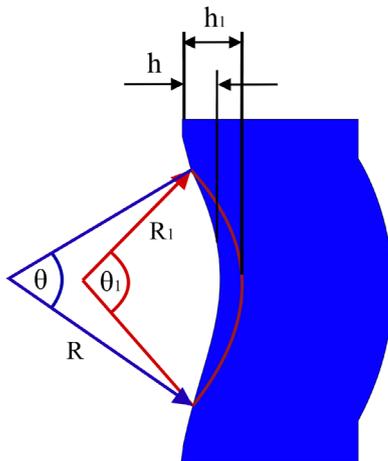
Adjusting the angle to reduce the defect caused by a lack of die fills on one of the convex contacts
